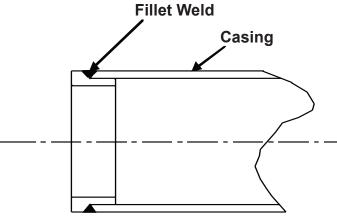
Shoulder Type, Drive Shoe Inserted, Fillet Weld
